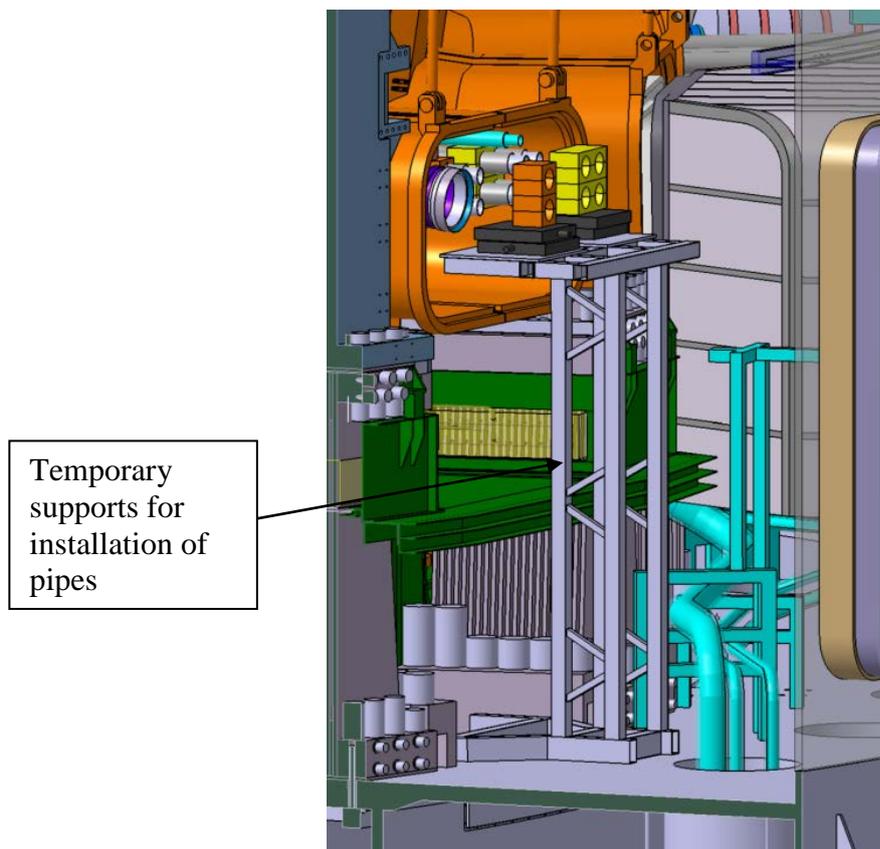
Illustration of a temporary support allowing the placement of pipes and clamping before welding
